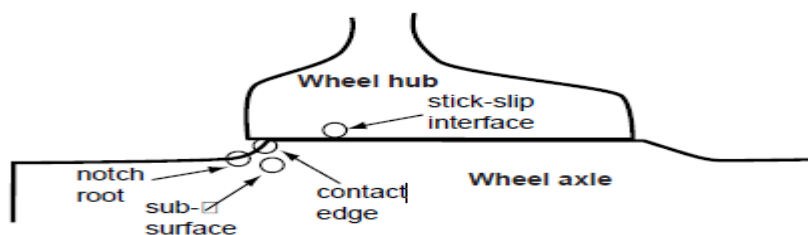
Possible locations for fretting fatigue crack initiation in a wheel–axle assembly.
